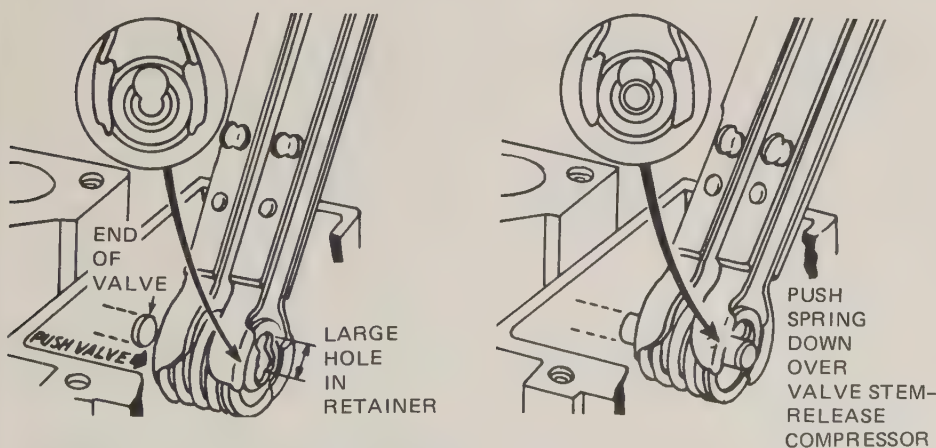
Compressing valve spring in preparation for valve installation. (Briggs & Stratton Corporation)
